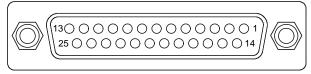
M4KDiscrete Module Adapter Cable Connector - DB 25-Pin Female - Front View
